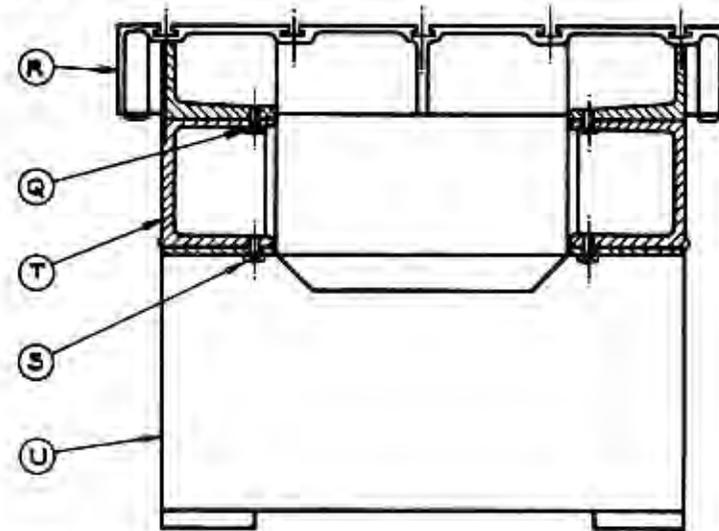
SECTION THROUGH FIXED TABLE WITH PACKING STRIPS.
